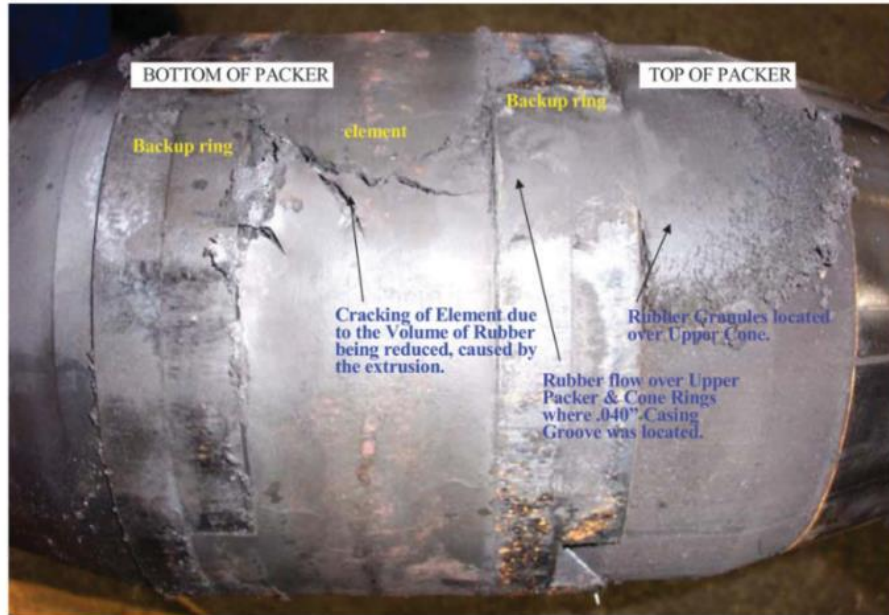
Failure in backup ring causing extrusion of elastomer element in packer equipment (Humphreys and Ross 2009)
